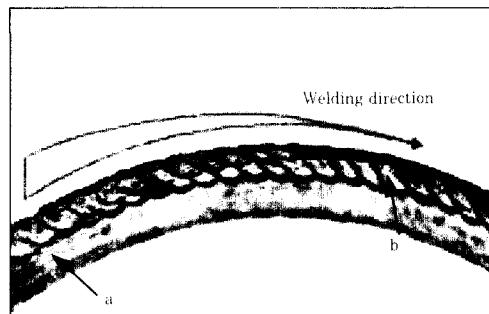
Application of FADE OUT mode in circumferential weld
